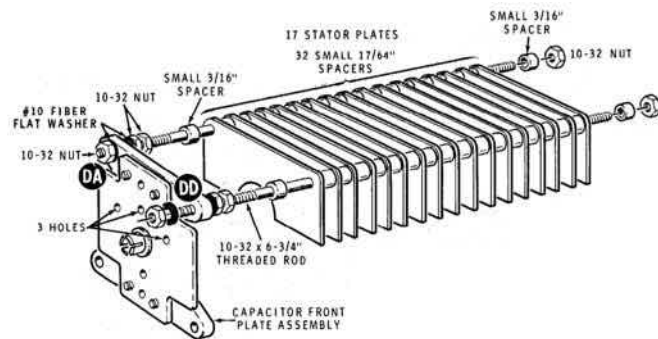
C2 Stator Assembly; from Heathkit Manual.
